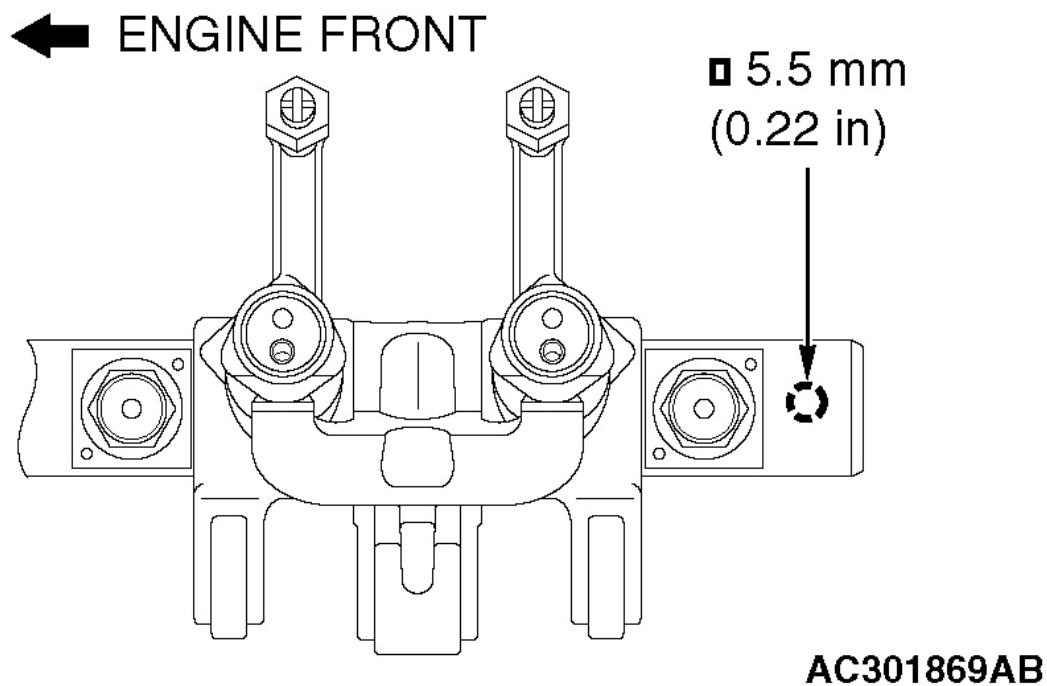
Tightening The Intake Rocker Shaft Mounting Bolts To The Specified Torque
